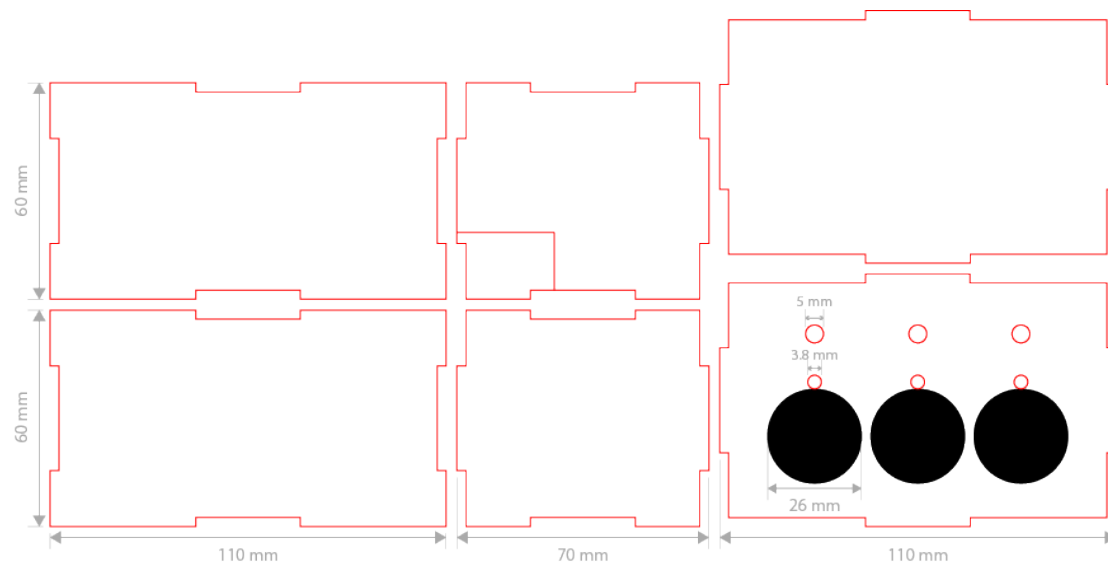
Display box's design for laser cutting. Red lines are for cutting, and black filled areas are for engraving.
